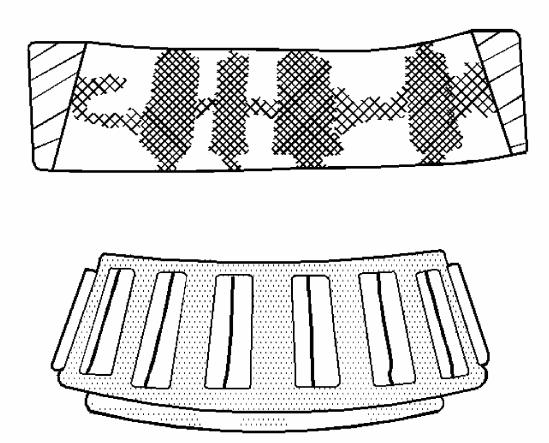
Identifying Abrasive Roller Wear Courtesy of GENERAL MOTORS CORP.
